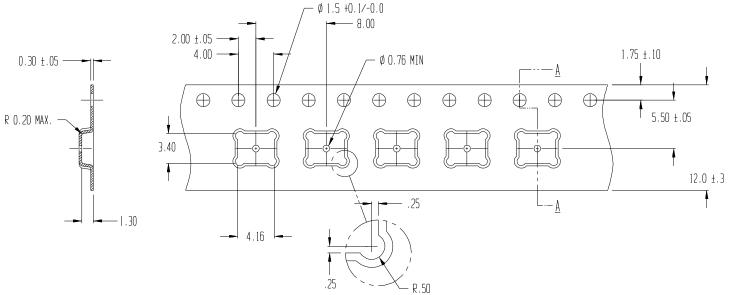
Tape for 4.00 × 3.00 mm Package (all dimensions in mm)
